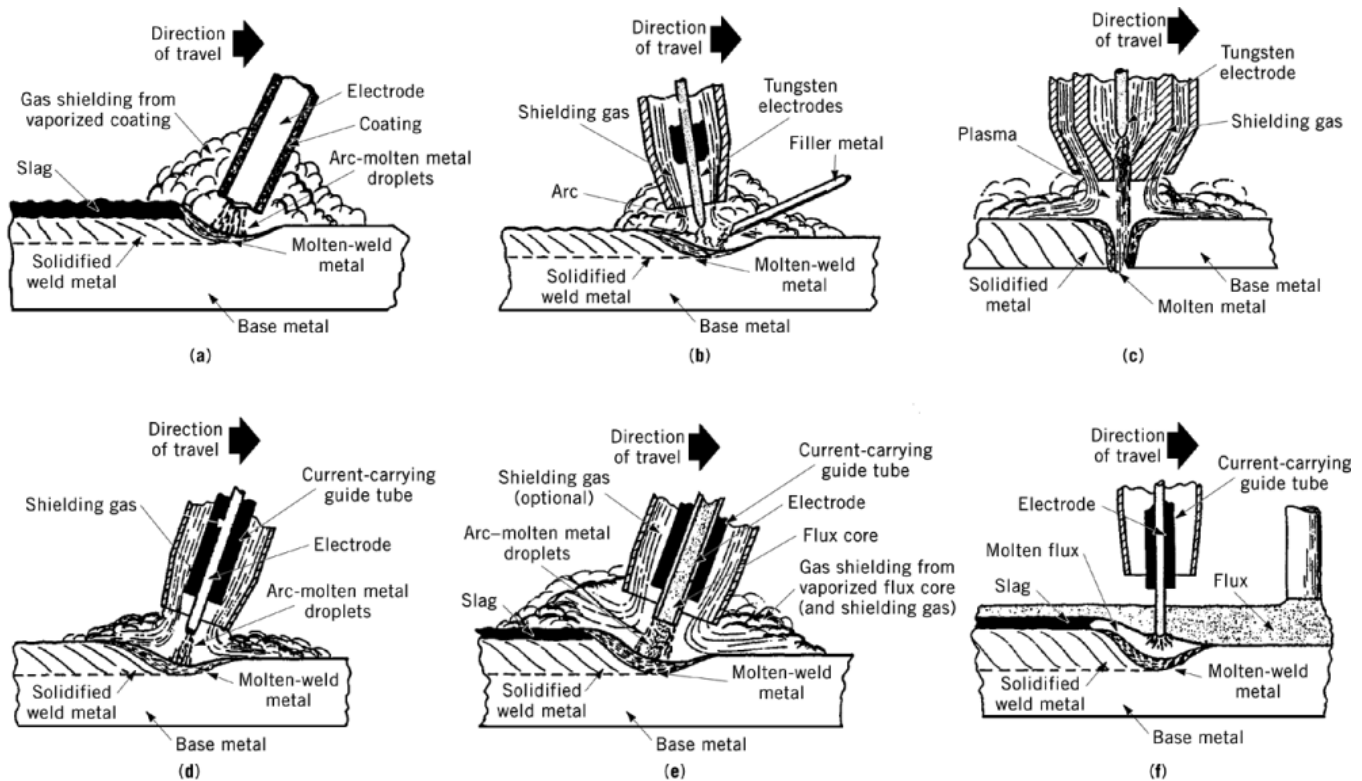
(a) The shielded-metal arc-welding (SMAW) process. (b) The gas-tungsten arc-welding (GTAW) process. (c) The plasma arc-welding (PAW) process. (d) The gas-metal arc-welding (GMAW) process. (e) The flux-cored arc-welding (FCAW) process. (f) The submerged arc-welding (SAW) process.
